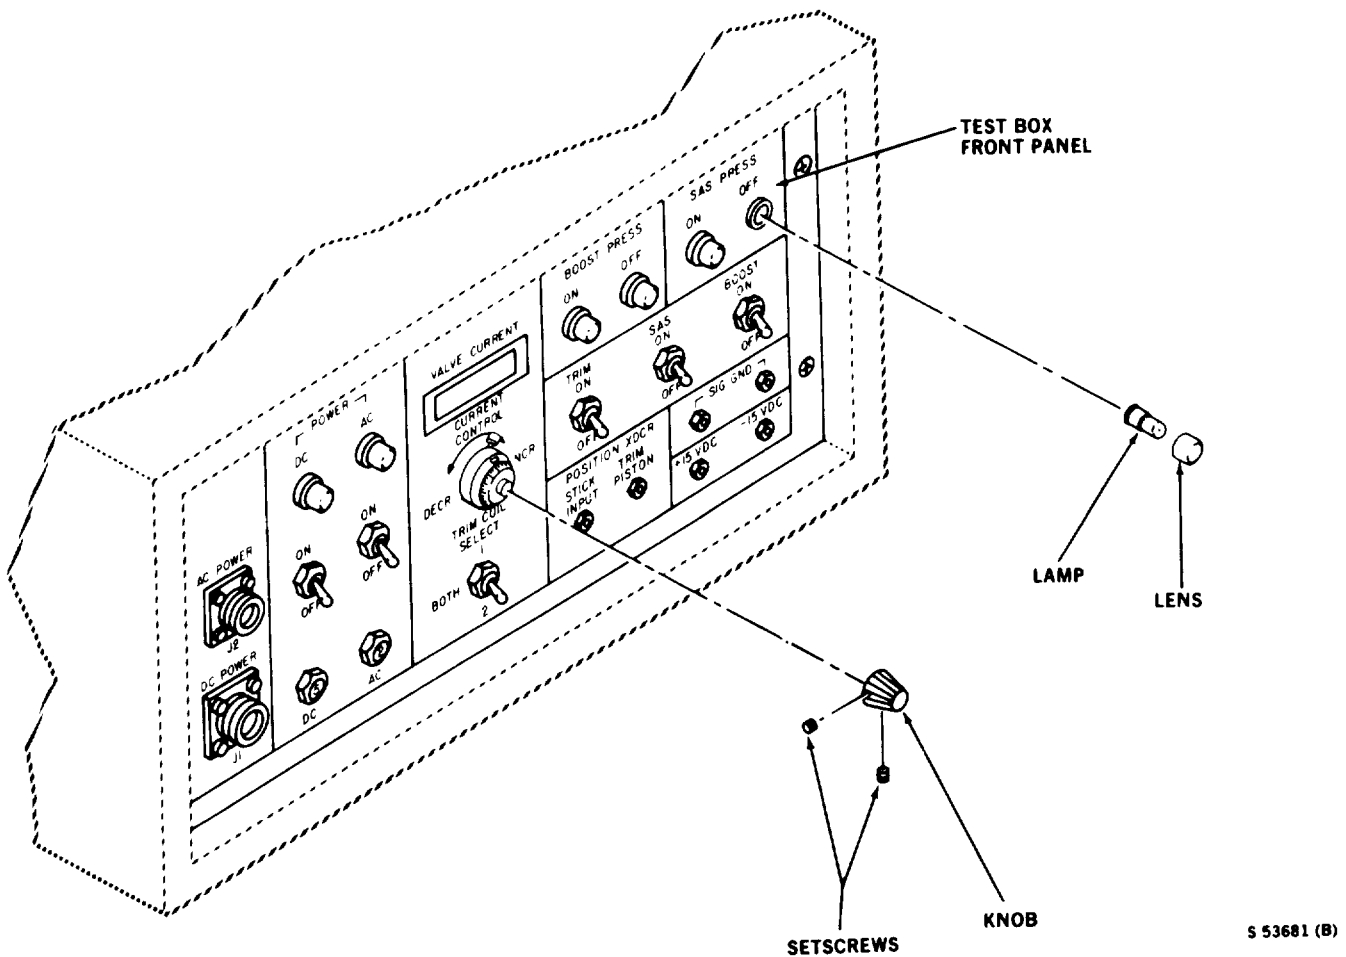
Panel Lamp, Lens, and Knob Removal and Replacement
